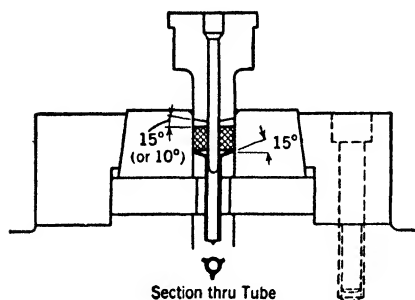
A. — A push-through extrusion die for a ribbed aluminum-copper alloy tube. Approximate tube dimensions $\frac{1}{8}$ -in. I.D., 0.020-in. wall $\frac{1}{4}$ -in. overall diameter.
